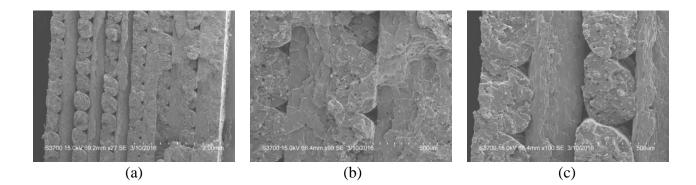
Linear CF PLA Fracture Surface (a) x27 (b) x90 (c) x100
